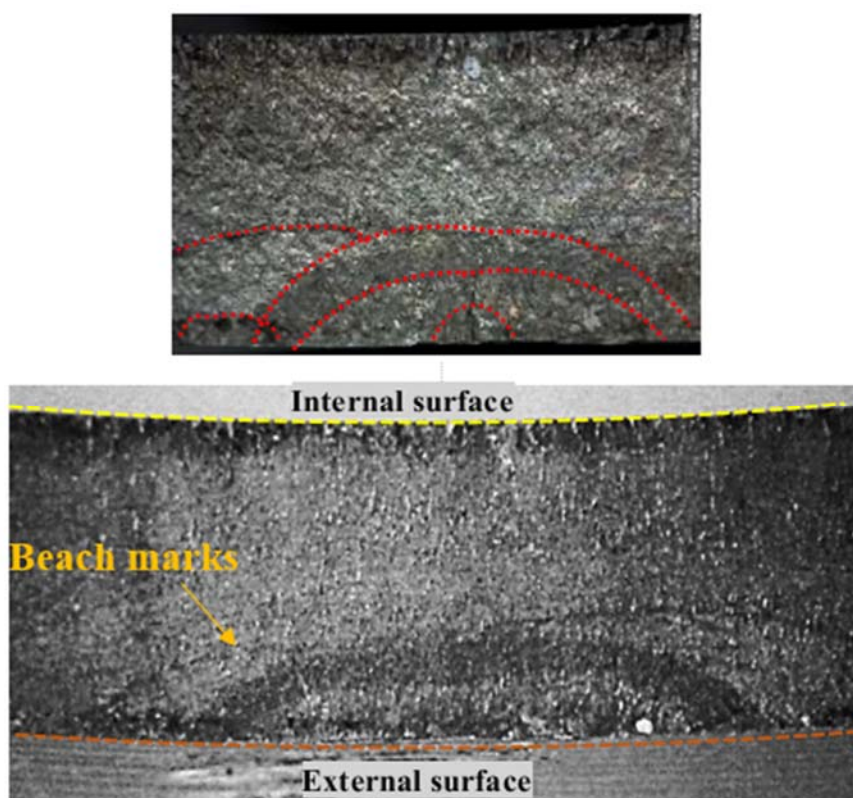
The stereo microscopic images of the fracture surface
